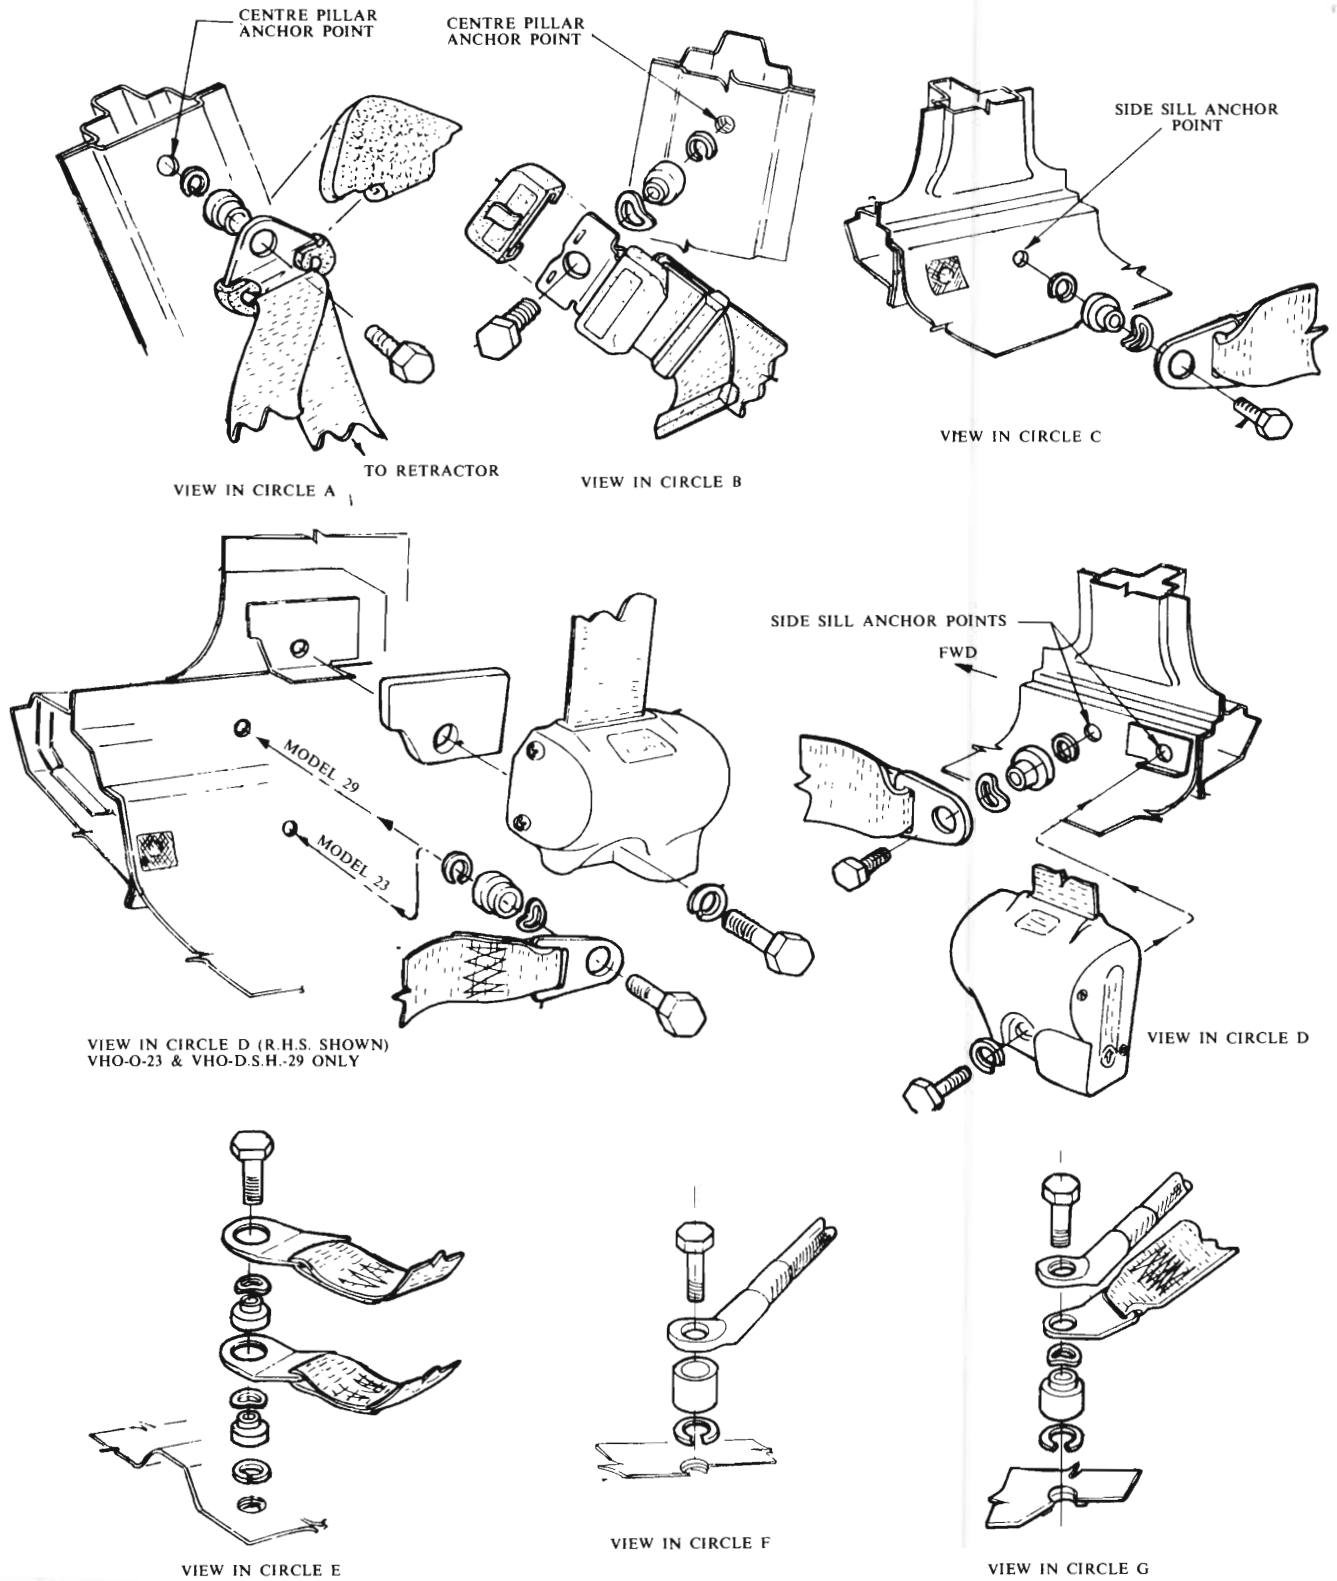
Front seat belt anchor points (read in conjunction with Fig. 60)
